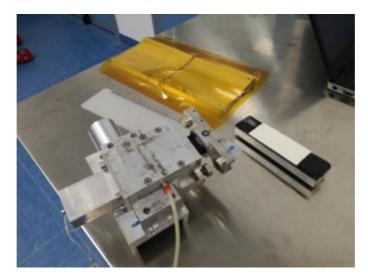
Pitch tool configuration for the polishing on the Zeeko machine.
